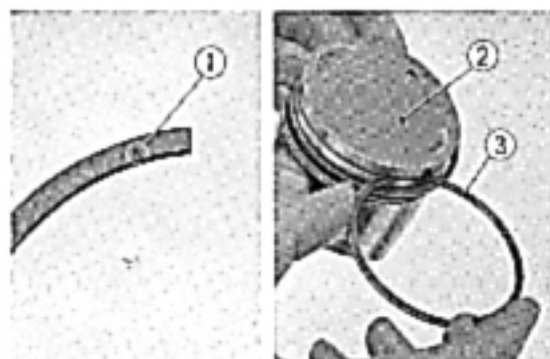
(1) Marks (2) Piston (3) Piston ring
